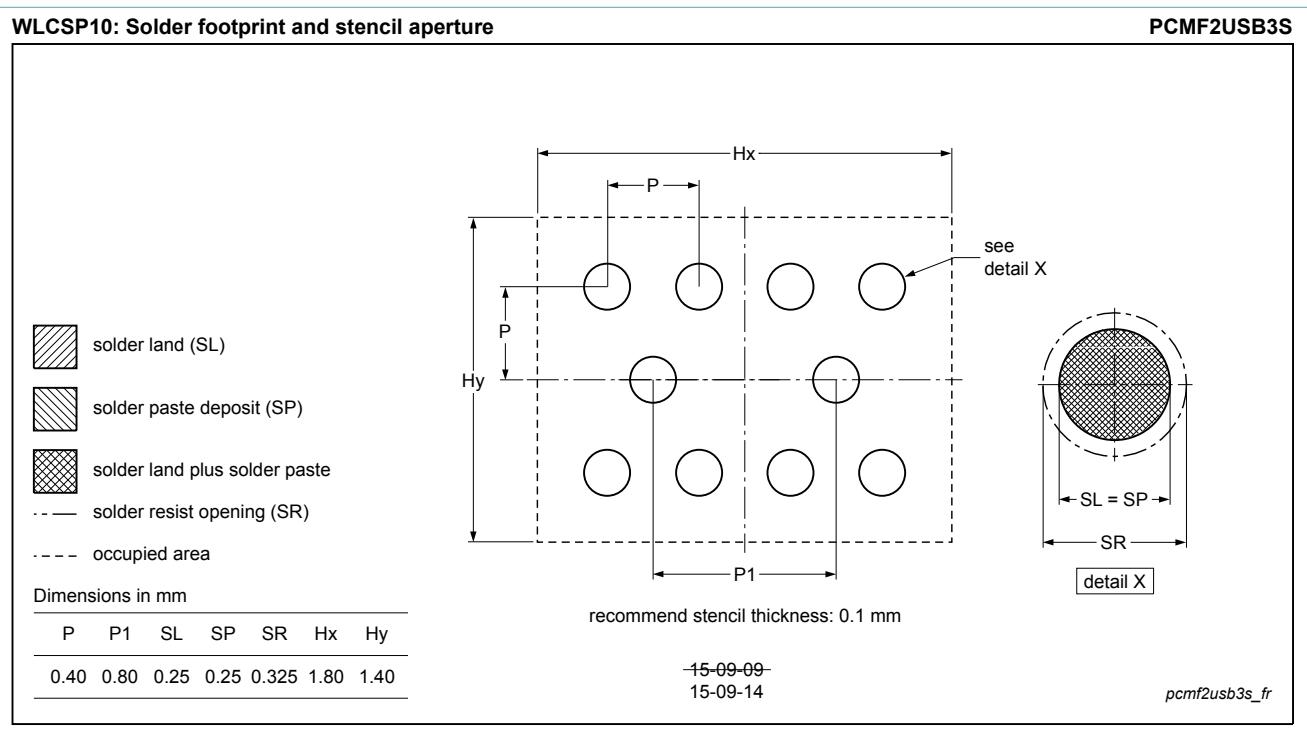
Soldering footprint WLCSP10 (PCMF2USB3S)
